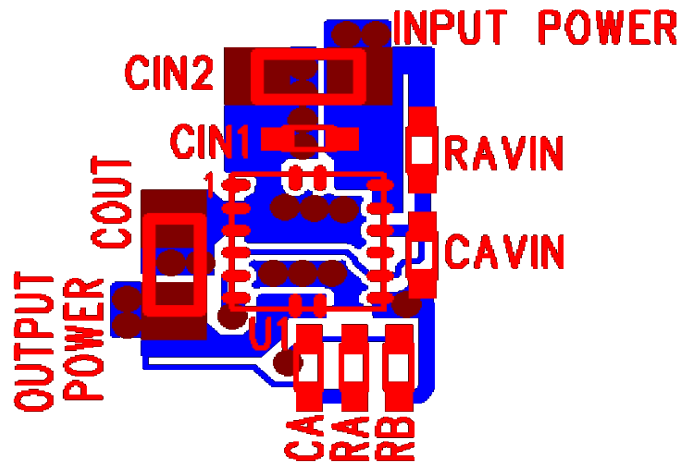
Top PCB Layer Critical Components and Copper for Minimum Footprint (Top View)
